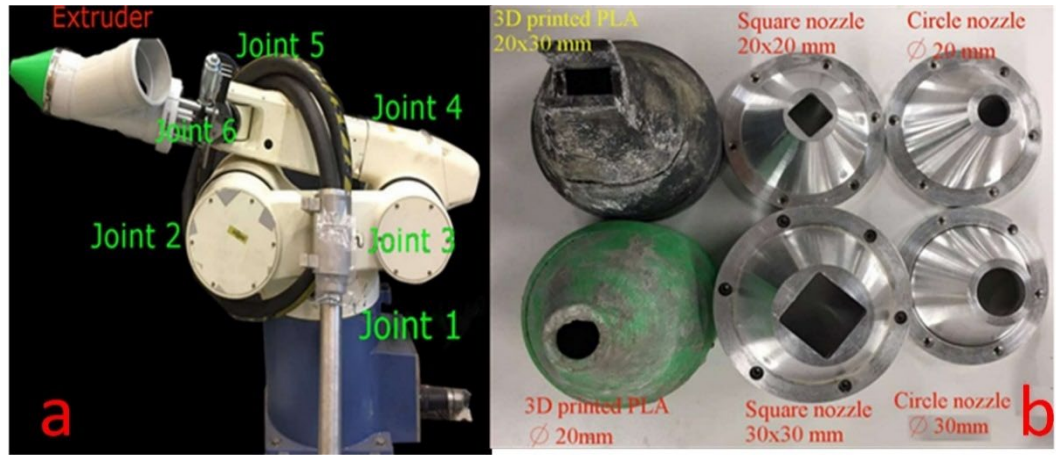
5: (a) Extruder joined to the Denso Robot. (b) Nozzle types made with Aluminium and PLA.
